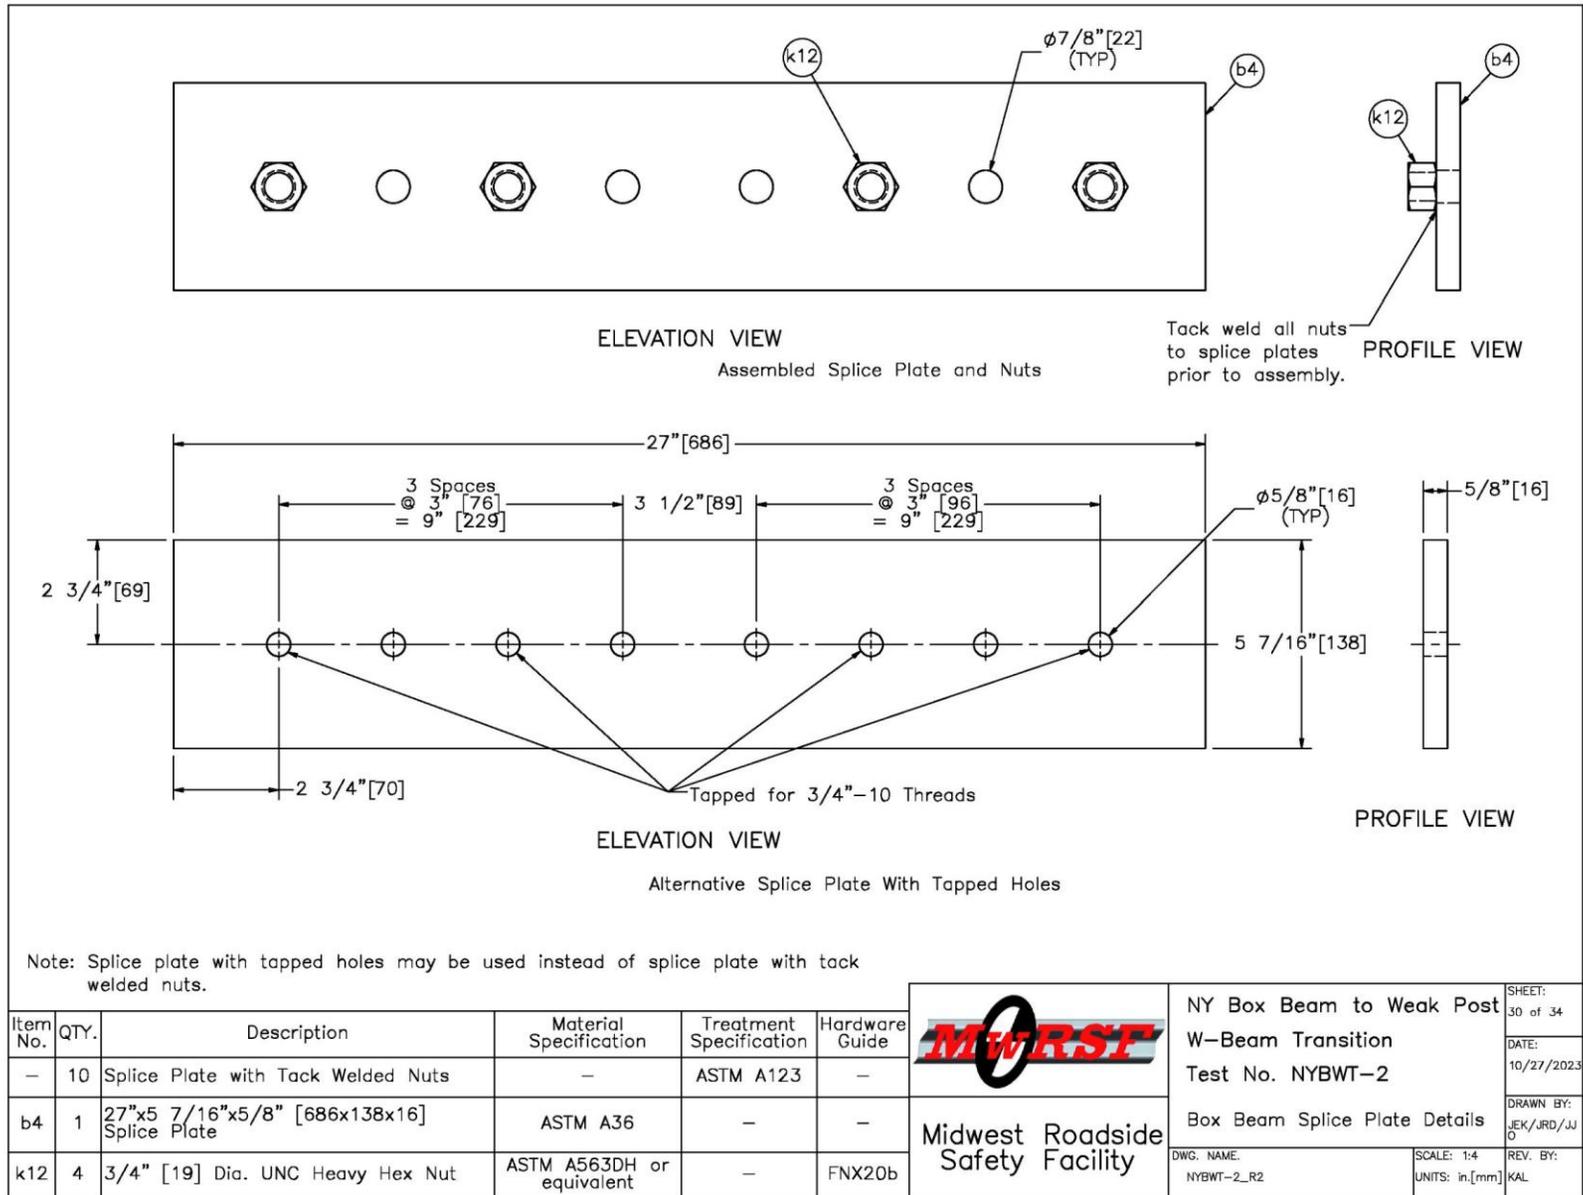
Box Beam Splice Plate Details, Test No. NYBWT-2
